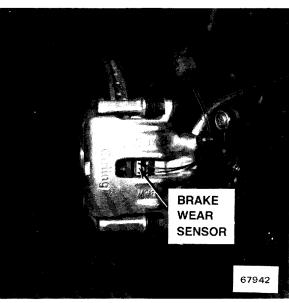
LH Front Brake Assembly (Wheel Removed)
